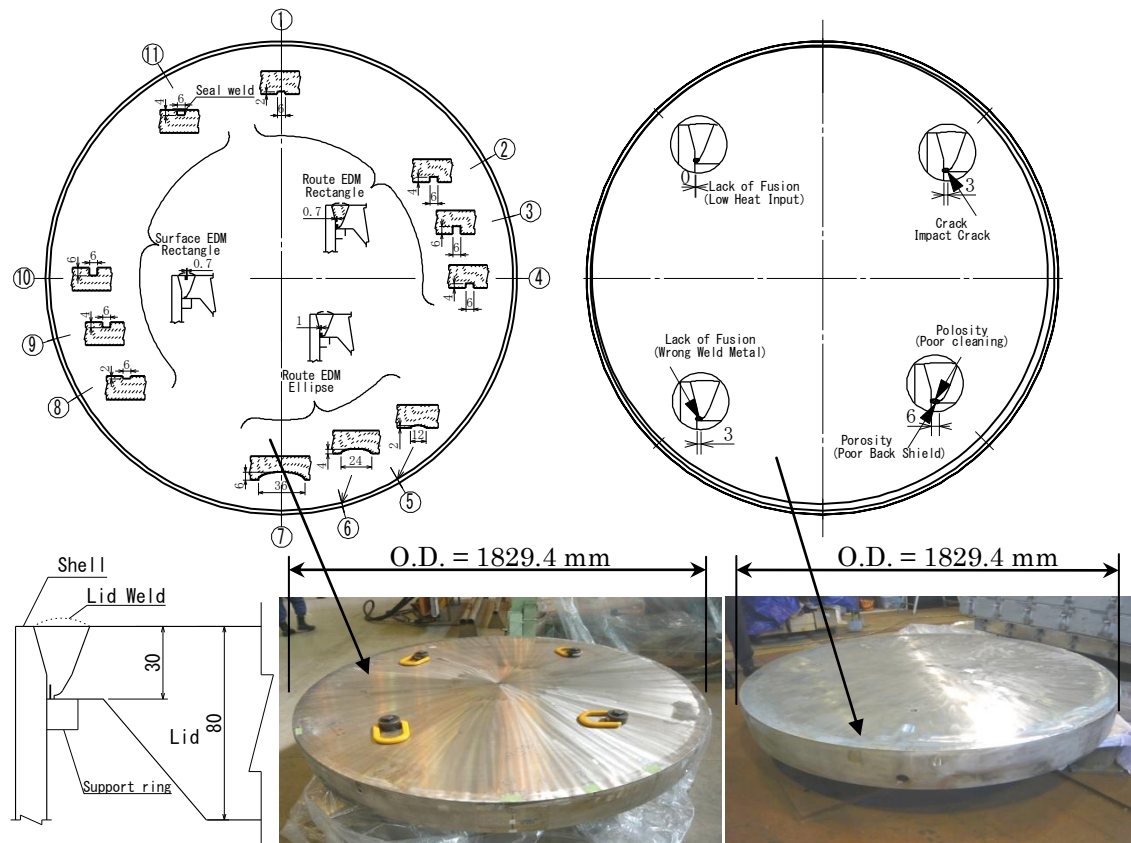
Canister Lid Mockups including EDM notch placements and welding flaw regions
